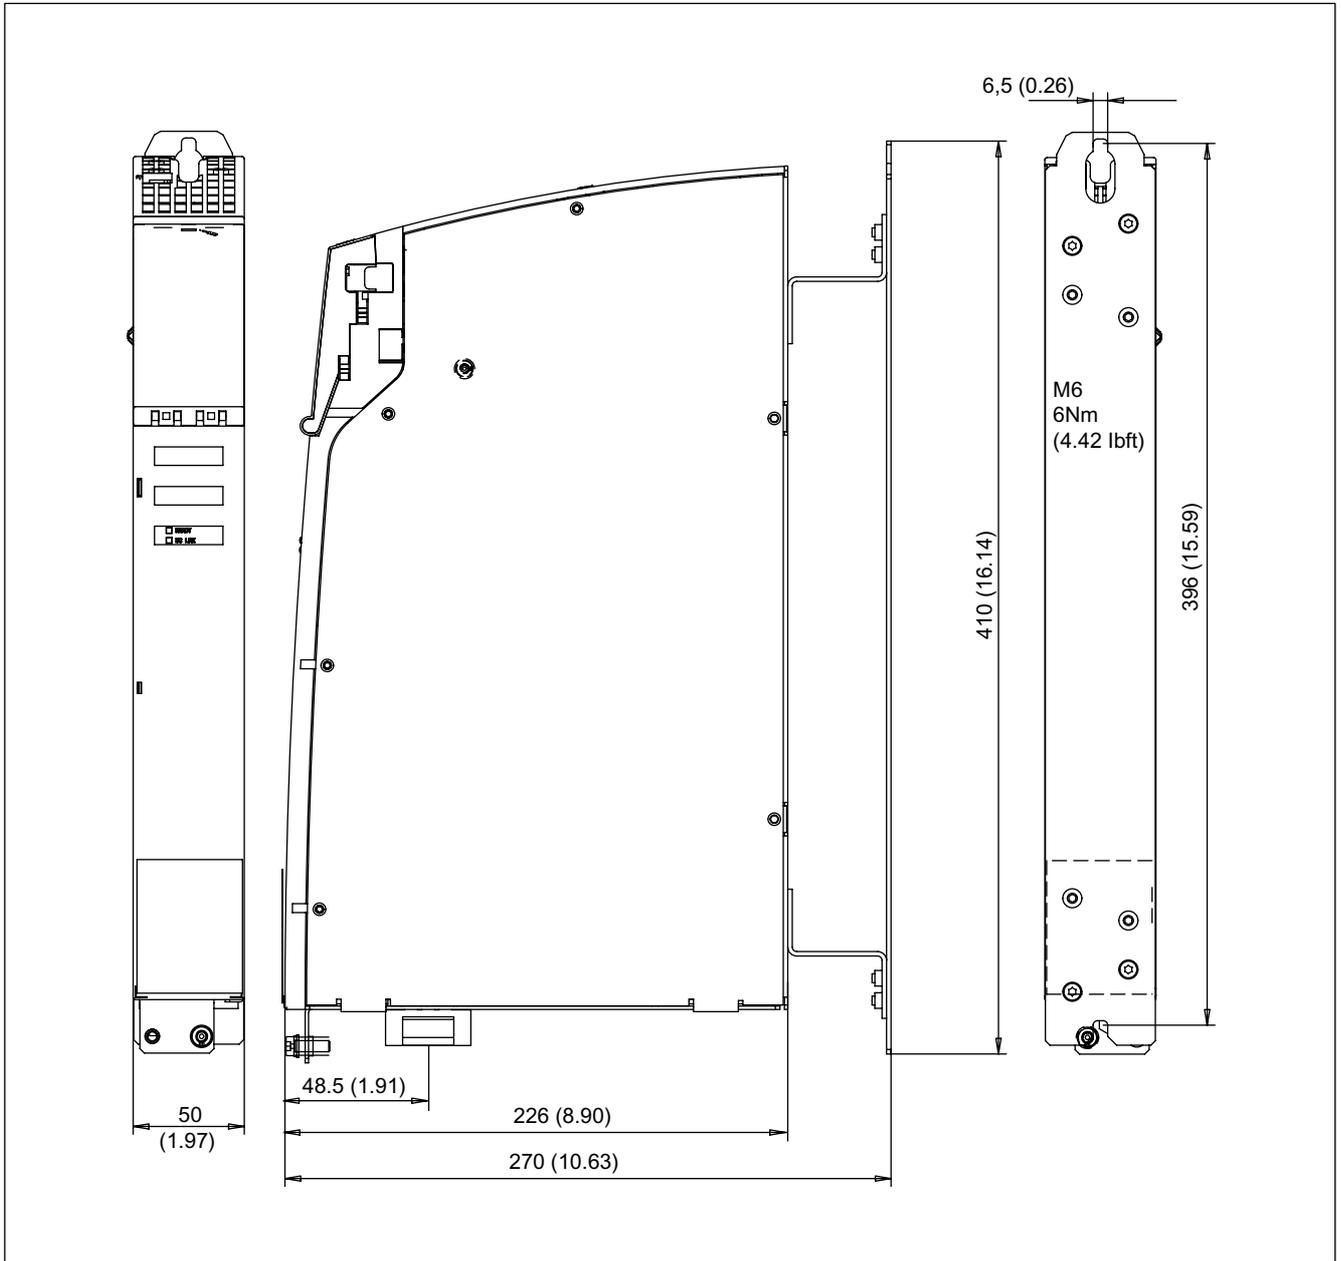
Dimension Control Supply Module, all dimensions in mm and (inches)
